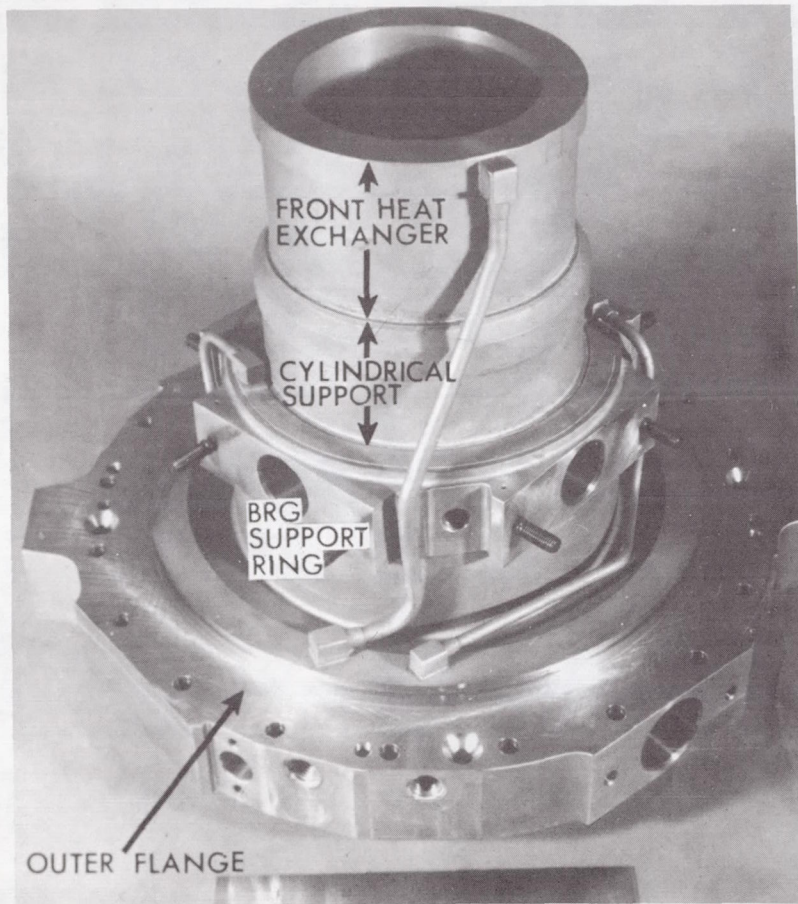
Front Journal Bearing Mount and Heat Exchanger Assembly (M-44253)
